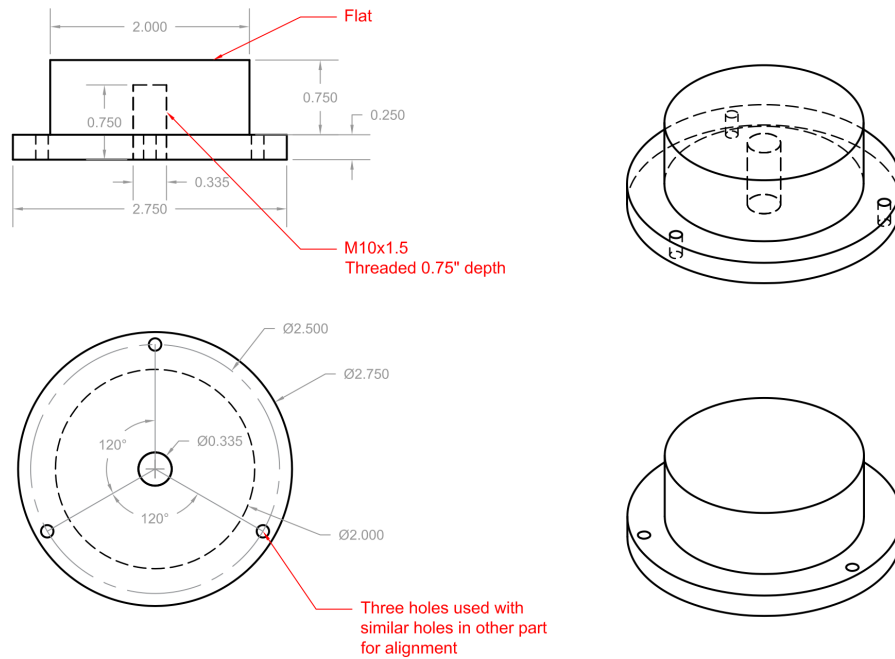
Stainless-Steel Mold. Top piece of the poker chip mold (all dimensions in inches)
